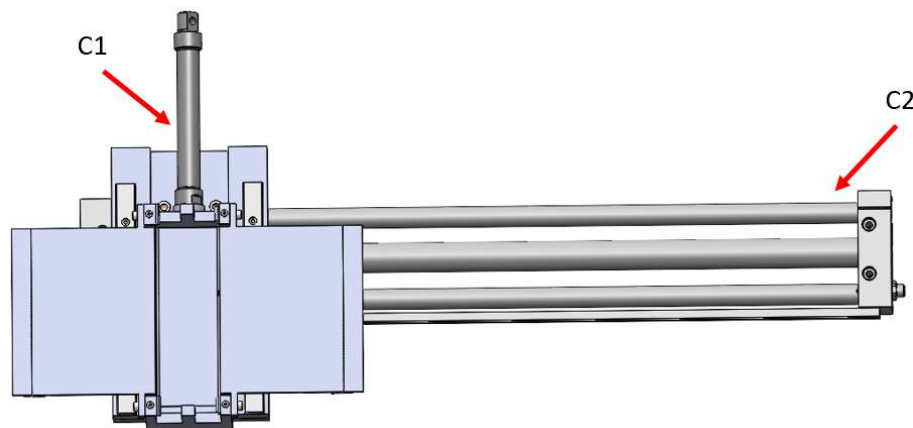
Design of sliding cylinder (C2) for mounting label container and label mechanism
